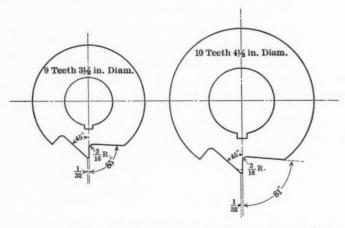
FORM OF SPIRAL MILLING-CUTTERS NOW USED BY THE CINCINNATI MILLING MACHINE COMPANY
